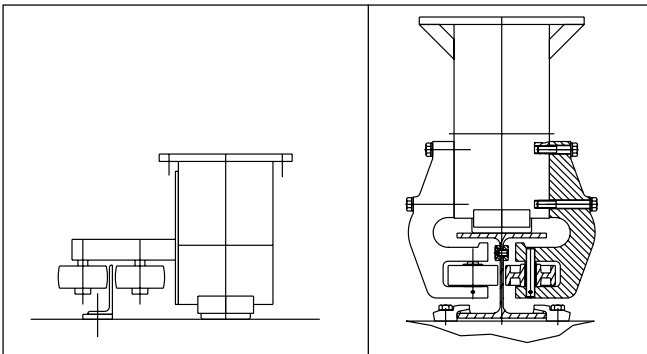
Traversing on concrete track. Fig. 5 - Traversing on rails with "L" shaped guide rail
